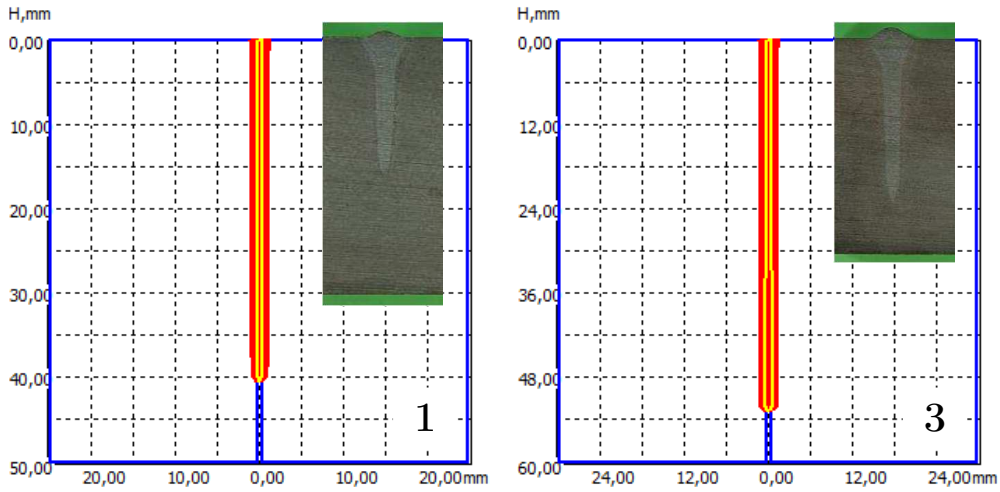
Section cut of bead on plate welds through 1.4313 steel specimen with a thickness of 30 mm from [76] with measured penetration depth H and fusion zone area S
